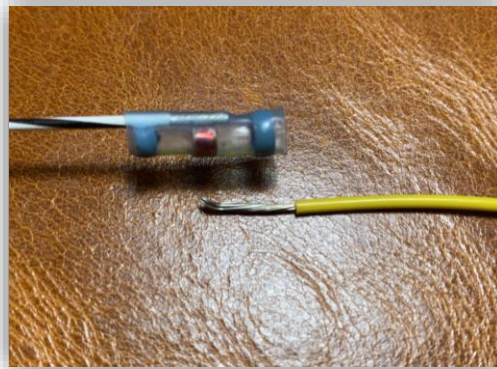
Solder Sleeve ready to attach Prepped Wire - Solder Sleeve (Left) / Prepped Wire (Right)
